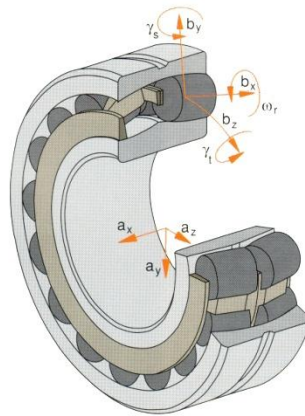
Skewing and tilting of roller in spherical roller bearing
